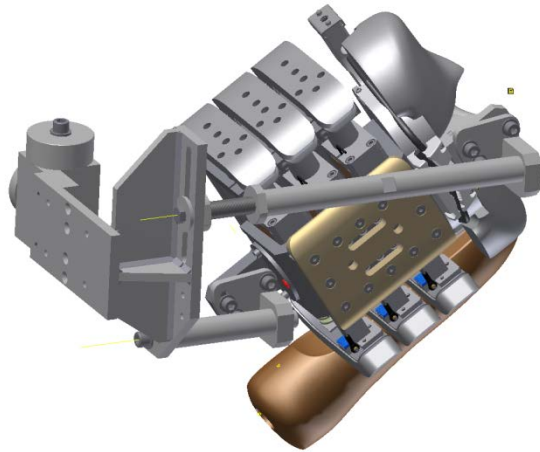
TIPT pusher fixture with adjustable brackets, jacket not shown
